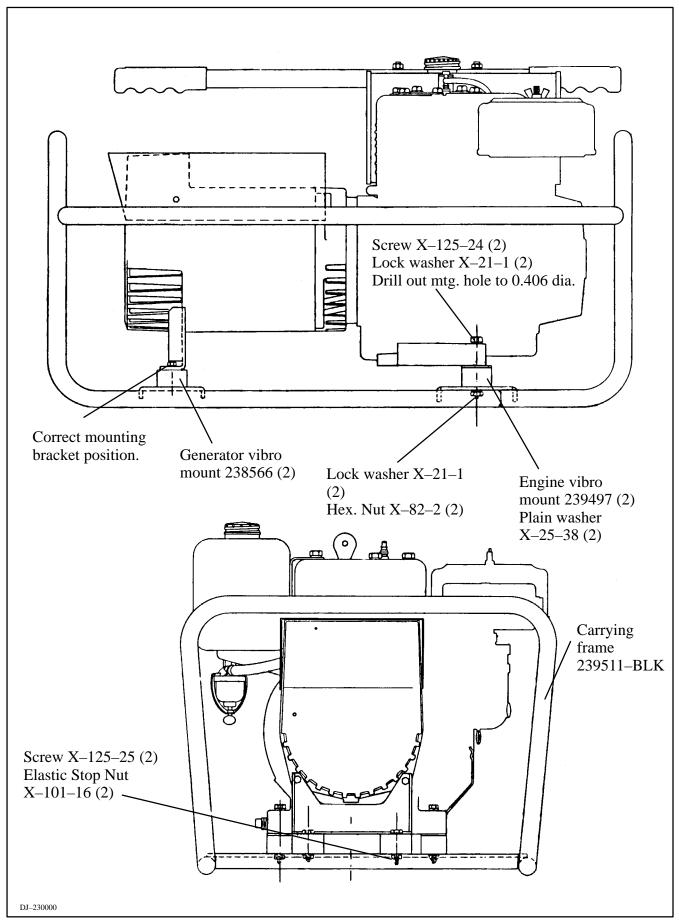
Mounting Carrying Frame Kit 3.5MBM Models
